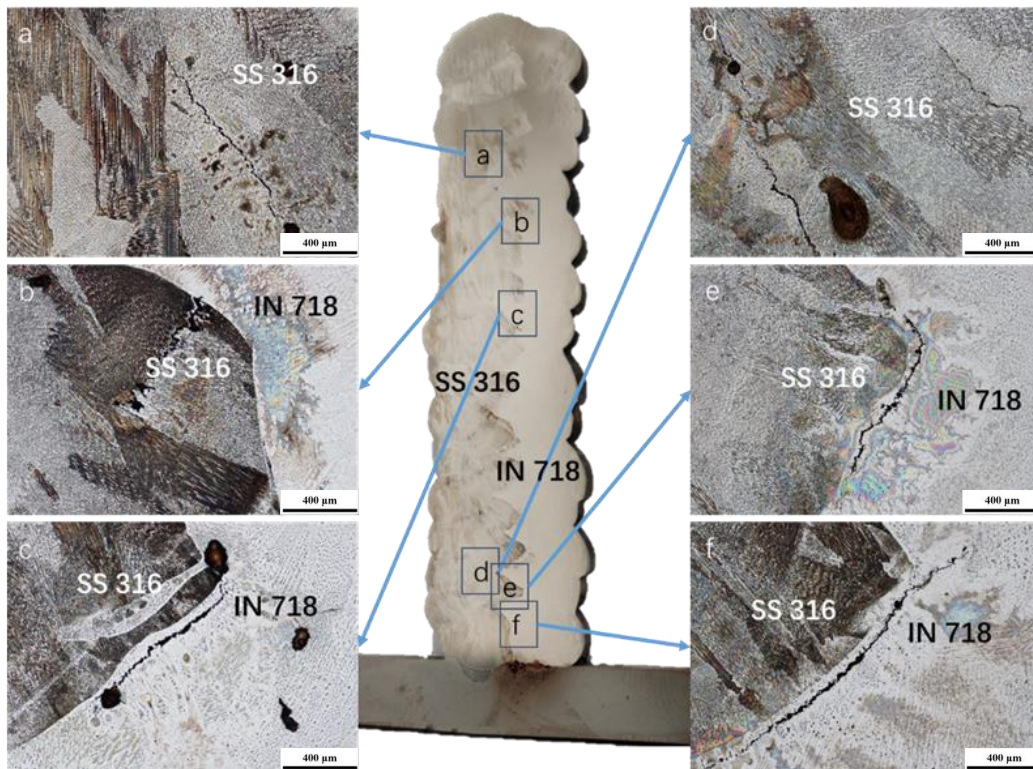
(2). Microstructure of hot cracks exist in Wall 6
